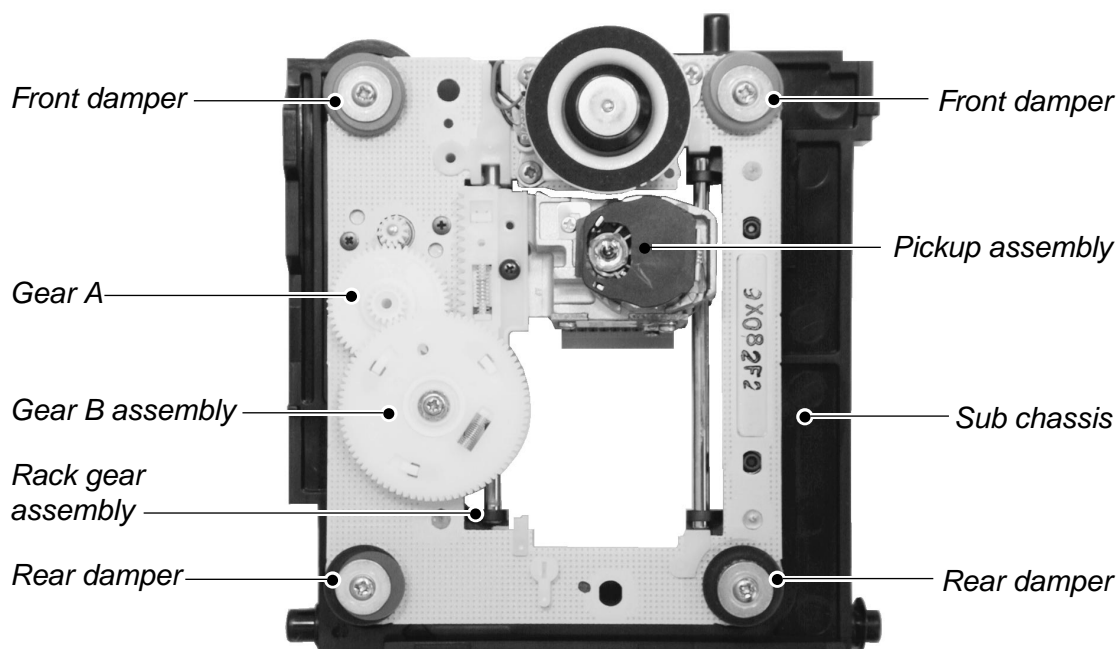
Pickup mechanism chassis assembly (Top side)
